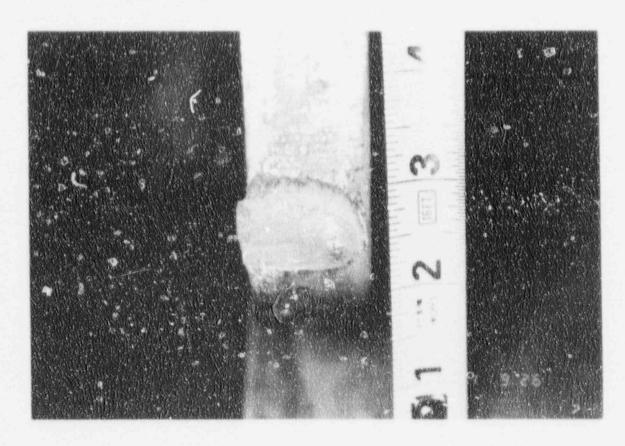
SOUTH SIDE LEVER LOCK ARM SHOE DAMAGE
